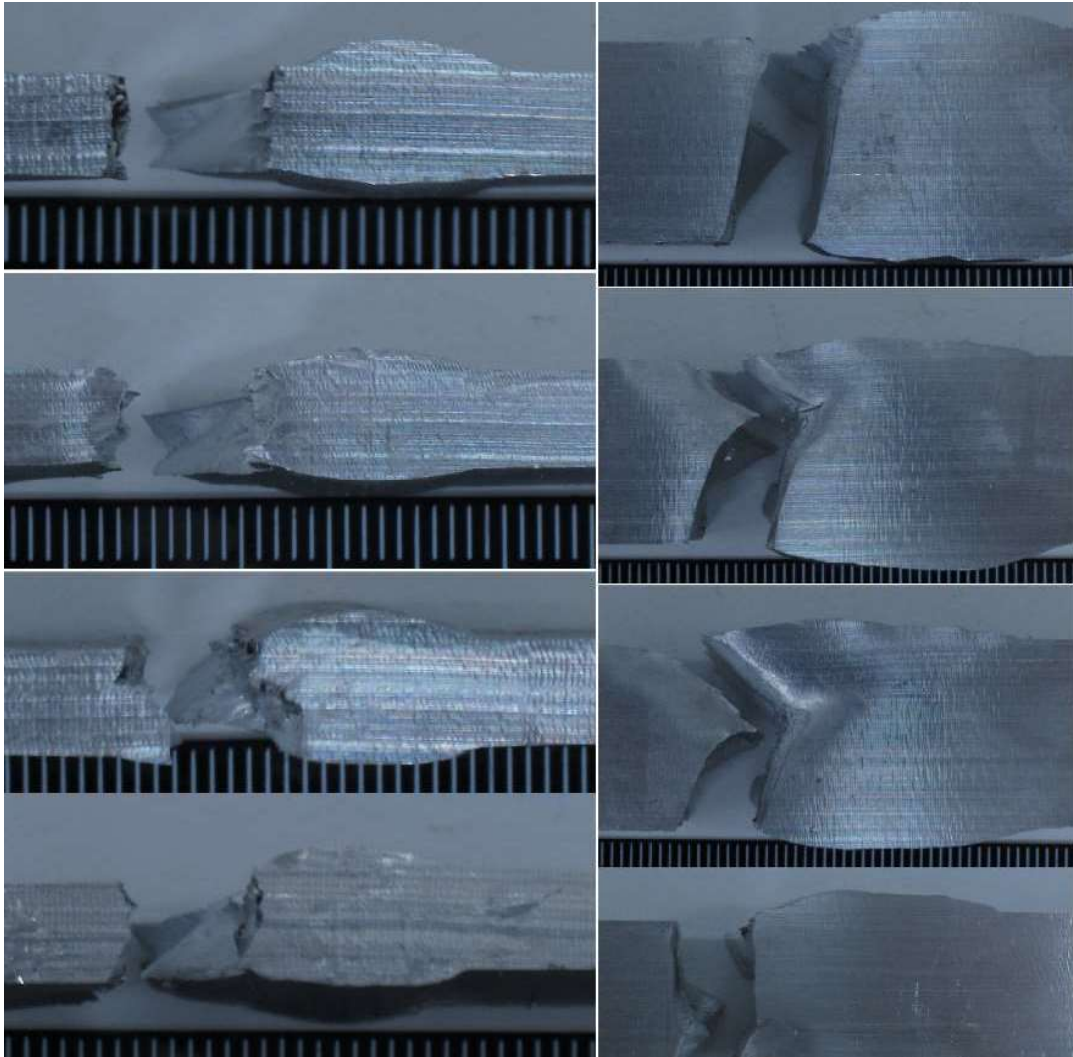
PICTURES OF FRACTURE SURFACES OF WELDED BUTT JOINTS
